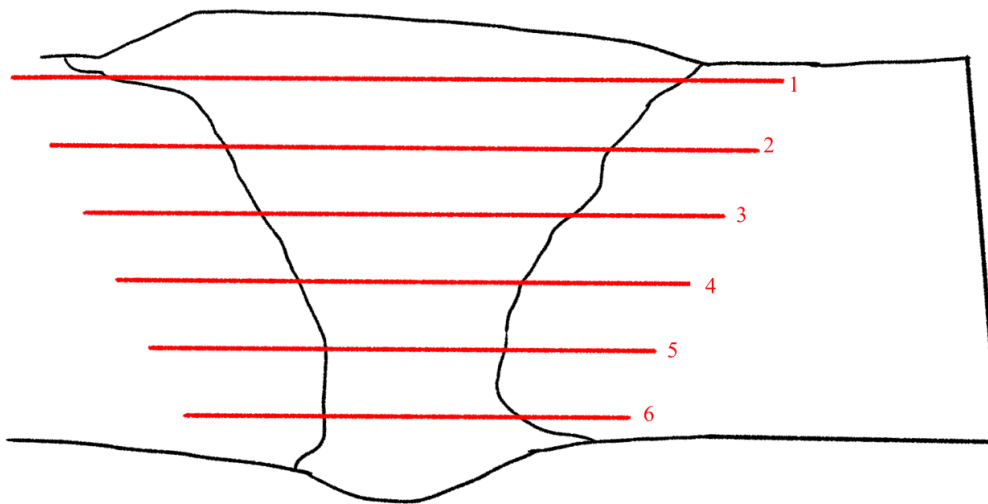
Sketch of the hardness test pattern over the weld.
